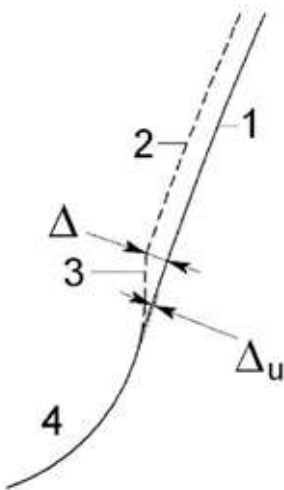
Small undercut Δ_u in the transition point between the final involute flank 1 and initial root fillet 4, 2 — preliminary involute flank before grinding, 3 — interim involute fillet flank; Δ — flank grinding stock.
